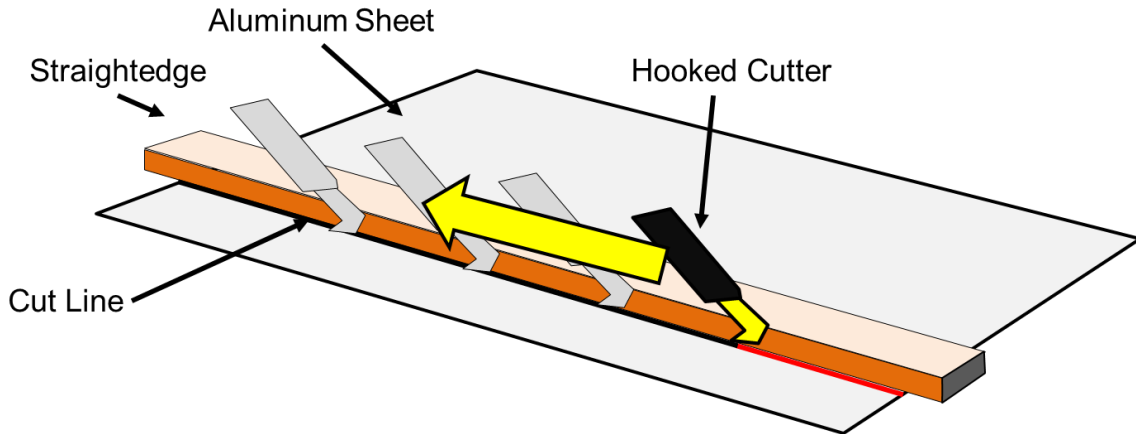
Long cuts on thin sheet aluminum using hooked cutter
